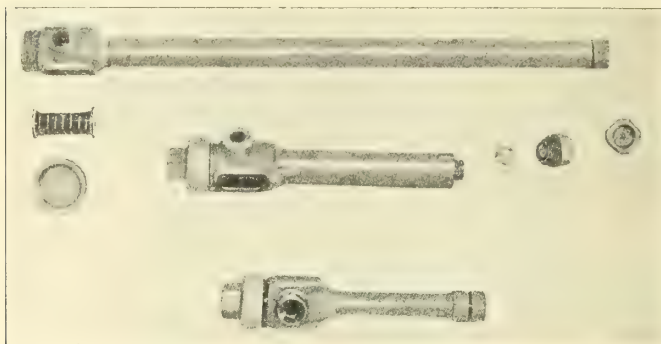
PARTS OF PEABODY MECHANICAL ATOMISER FOR BURNING OIL FUEL.
